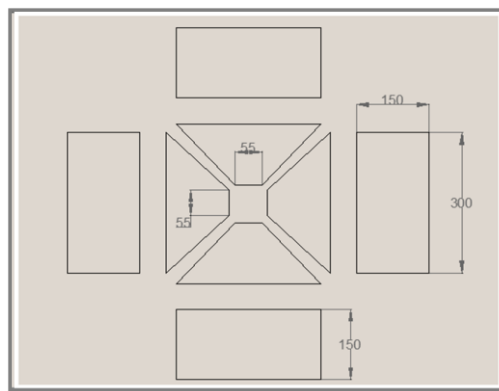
PARTS OF HOPPER PRIOR TO ASSEMBLING
